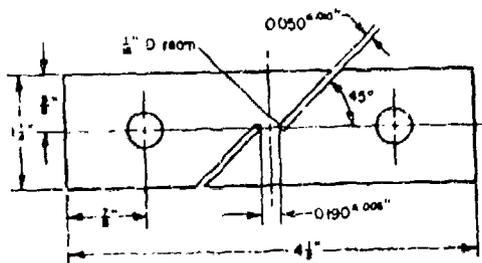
SHEET SHEAR TEST SPECIMEN
